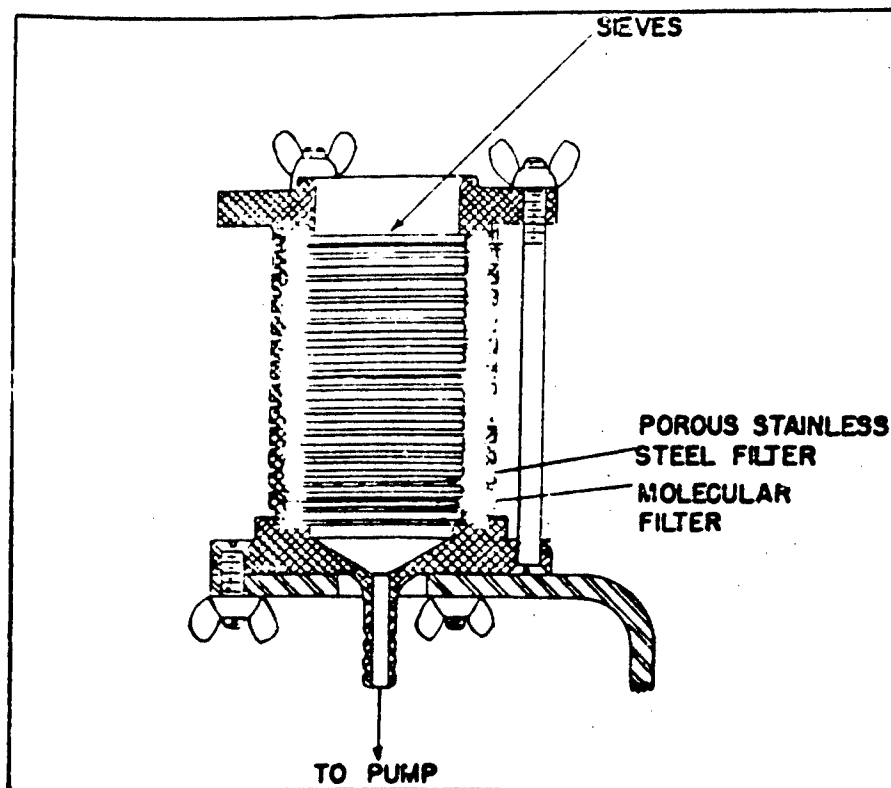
Cross-sectional Drawing of a Particle Separator
